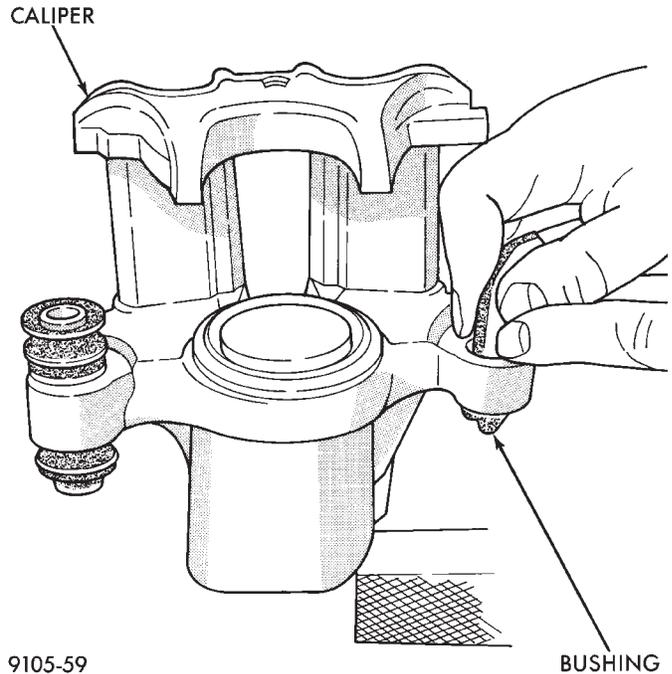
Installing Caliper Guide Pin Sleeve Bushings
